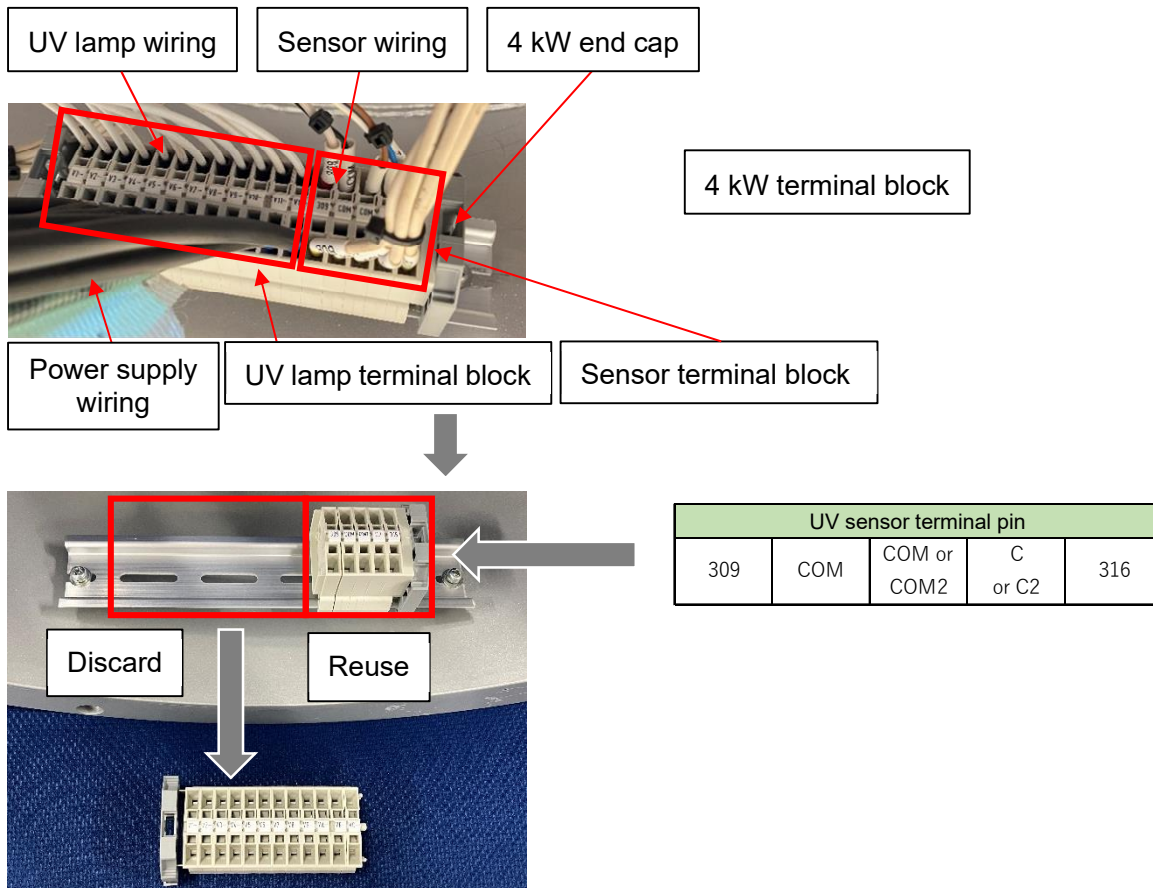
Disassembly of existing 4 kW UV lamp terminal block (opposite side)
